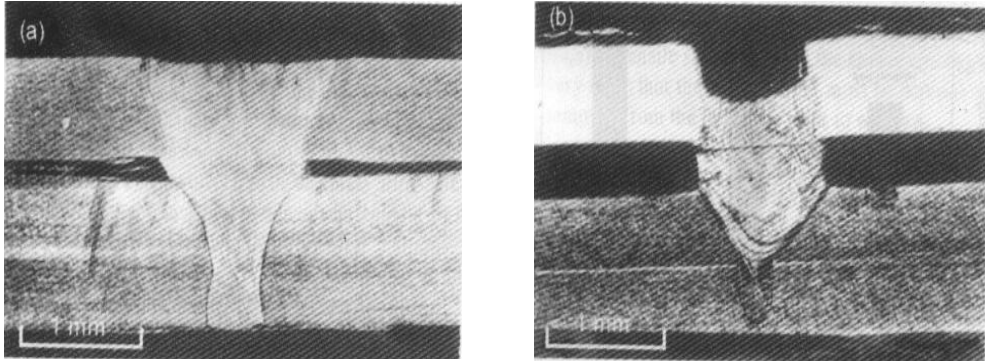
Photographs of cross sections taken from laser lap welds produced using (a) 0.1mm and (b) 0.3mm gap between the sheets.
